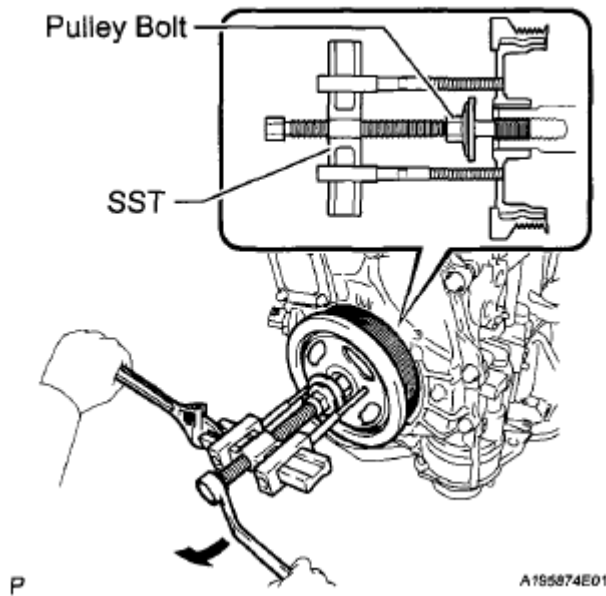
Removing Crankshaft Pulley Using SST And Pulley Bolt
